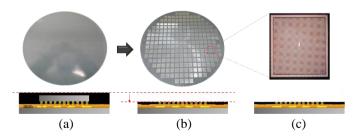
Void inspection process: (a) molded wafer, (b) mold grinding to bump area (p-lapping) and (c) visual inspection.
